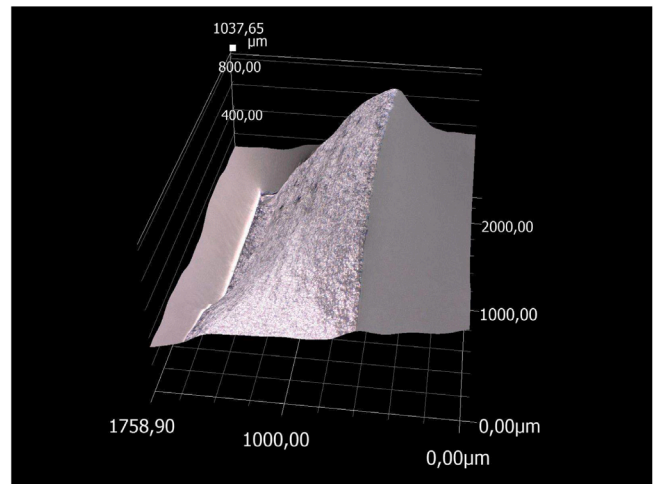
3-dim. view of the top side inclined residual fracture surface of the second specimen (Mag. 150 x).
